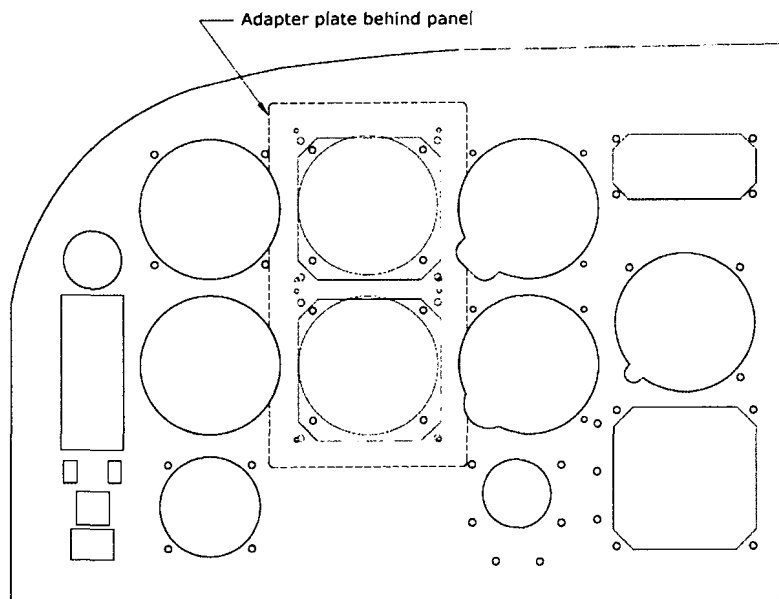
Match drilling through panel, using adapter plate as template
